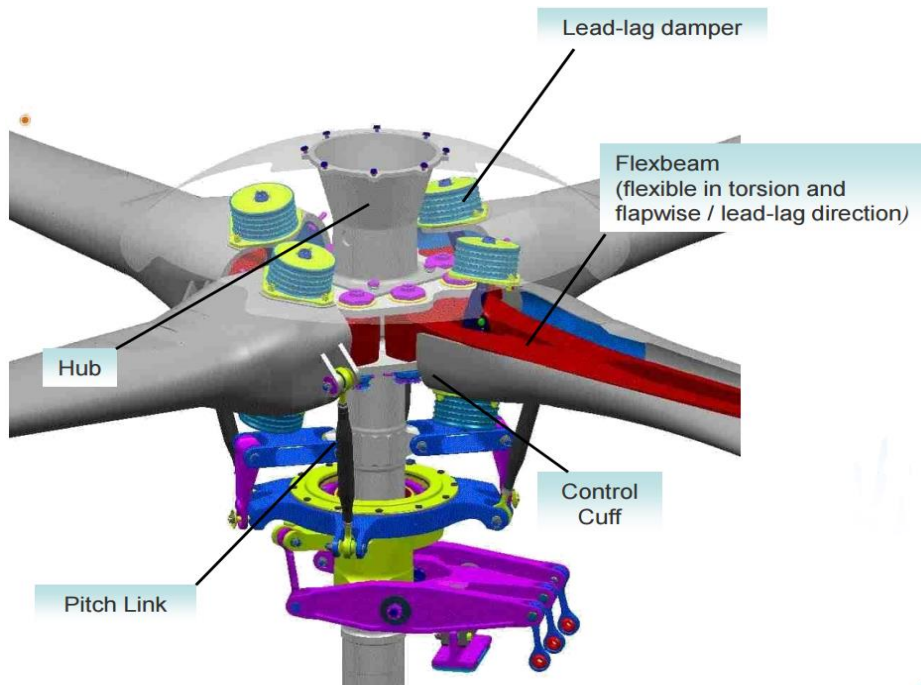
Hingeless and Bearingless Type of Main Rotor of EC135 [40]
